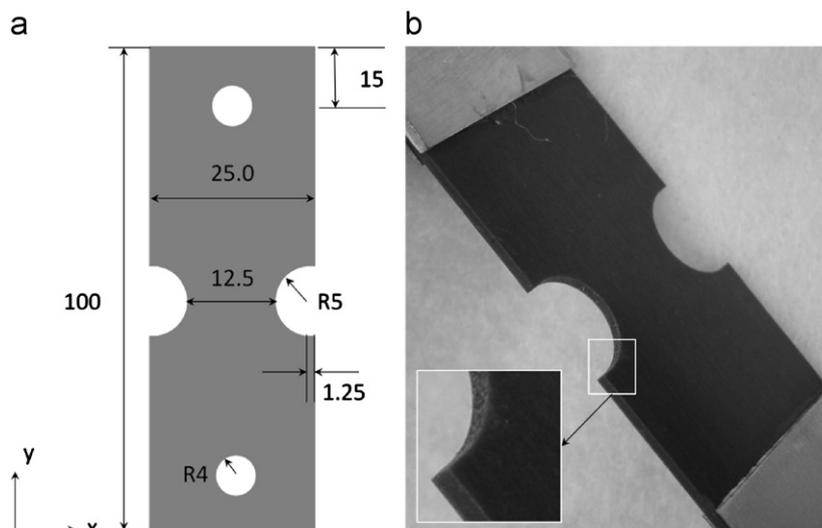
Bulk specimen: (a) dimensions (in mm) and (b) the edge quality from CNC-cutting.
